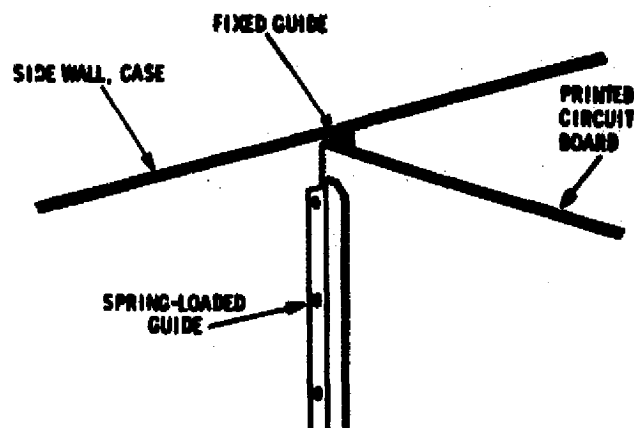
Card Guide, Printed Circuit - Positive Securing
